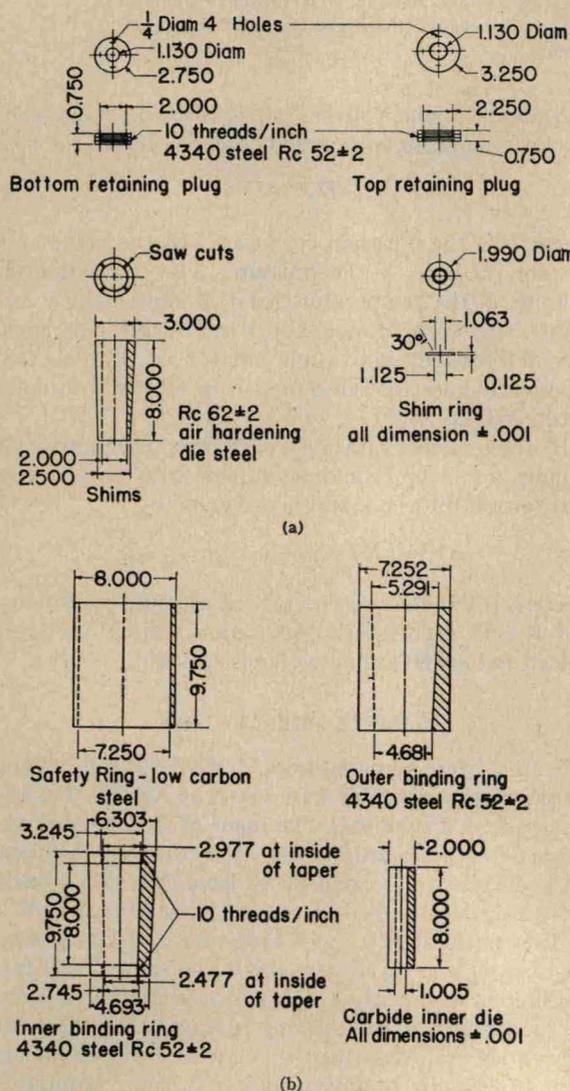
(a) and (b), high-pressure vessel component parts shown in partial cross section. Safety ring, outer binding ring, inner binding ring, shims, and die are assembled successively in a hydraulic press. Shim rings are then introduced between both screw-in retaining rings and die.
